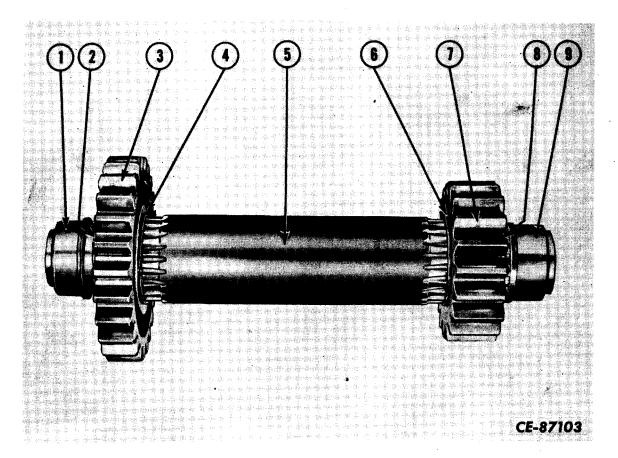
Reverse Idler Shaft. Section 3 Page 52
